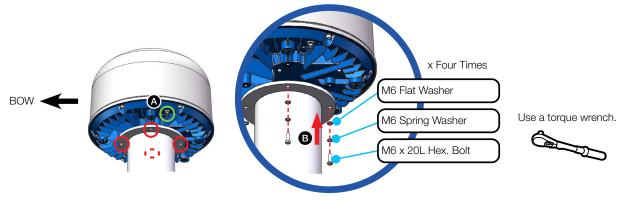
Mounting Antenna using Inner Holes (with M6 Bolts)
